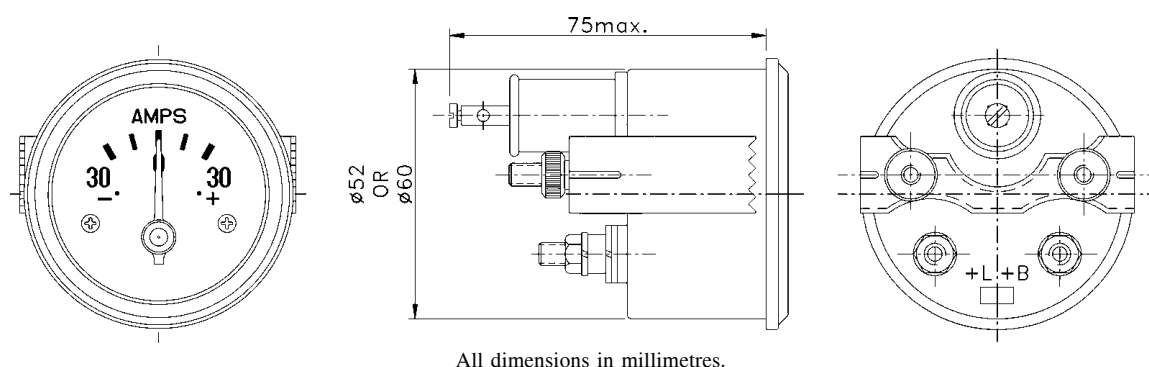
MOUNTING DIMENSIONS FOR AMMETER
